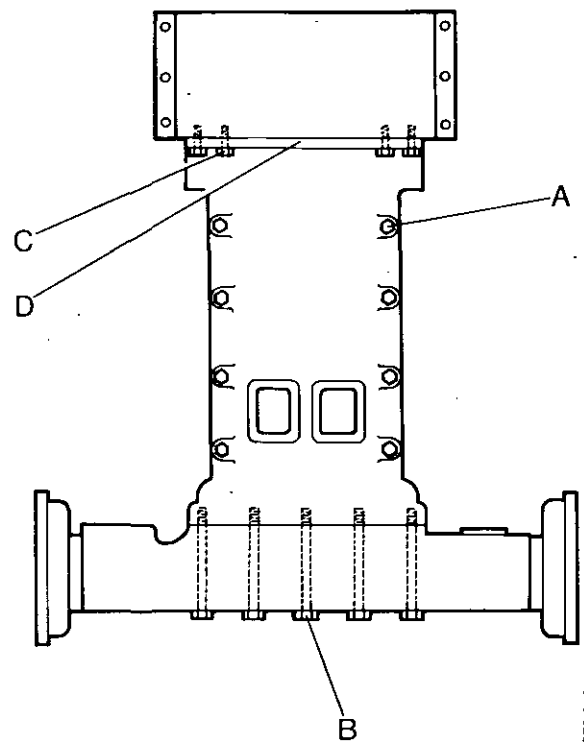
GEARBOX COVER AND REAR AXLE CASE
